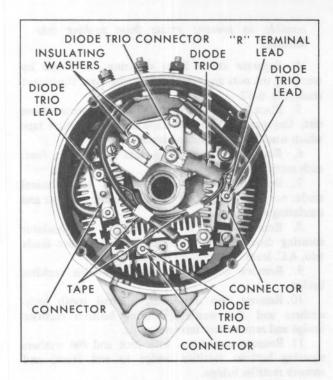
Slip Ring End Frame Components (With Heavy Duty Generator)
